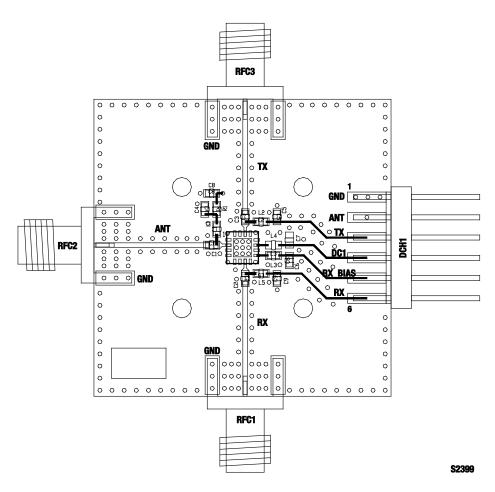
SKY12208-306LF Evaluation Board Assembly Diagram
